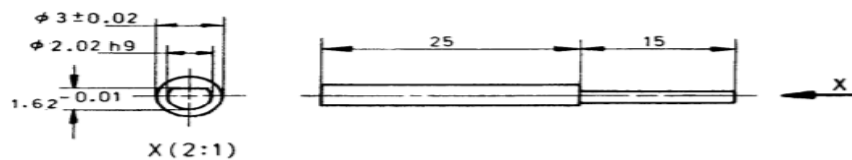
NOMENCLATURE OF NEEDLE BAR FOR SEWING MACHINES
